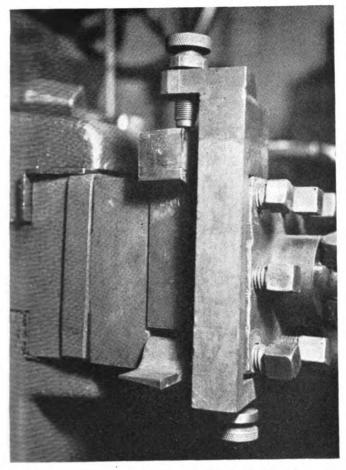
The gage used to set up the finishing tool—After the cutting edge of the tool is set against the face of the adjusting screw shown at the top and the tool is tightened in that position, all finish cuts are made with the micrometer dial on the side head rather than by calipers—Note scribe marks line-in-line on the adjusting screw and body
